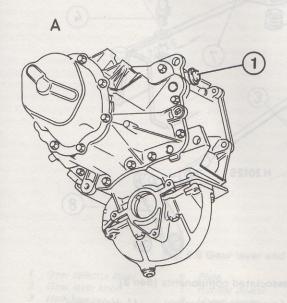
Gearbox/final drive level plug location (arrowed) -1986 on (Sec 2)
